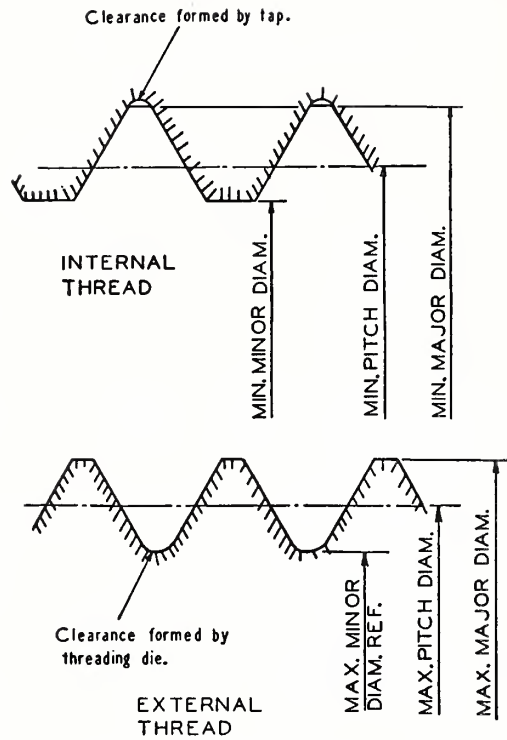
Thread dimensions to be determined for a special thread.
